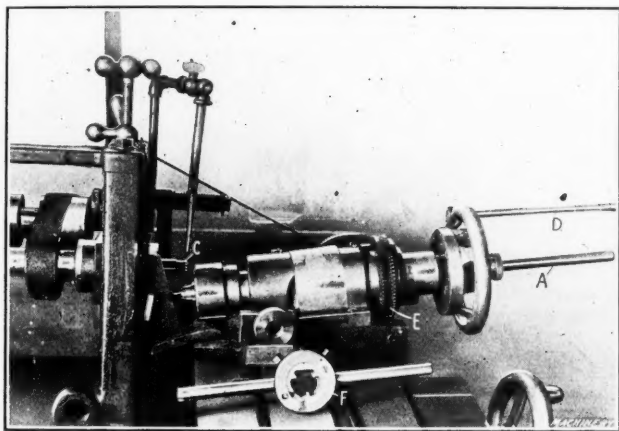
Cutting the Thread on the Breech End of the Barrel
